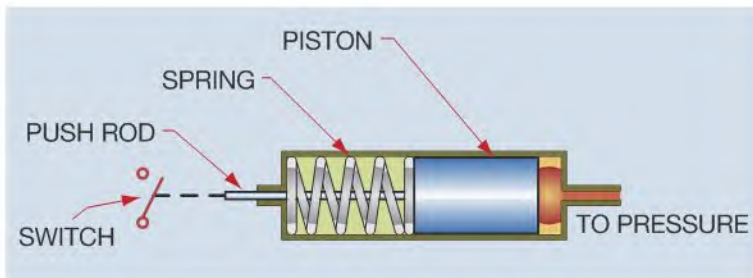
Piston type pressure switches can be used for pressures up to 15,000 psi.
